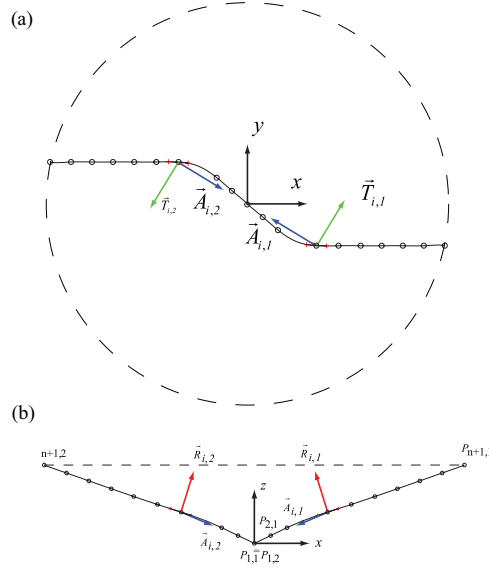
Drill edge geometry. (a) top view of the drill, (b) side view of the drill [5]
